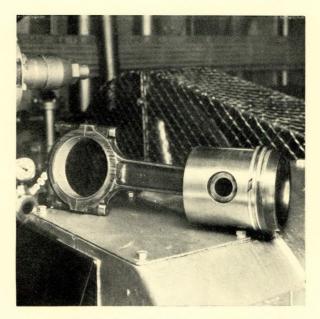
Vee-block refrigerating compressor: piston and connecting rod assembly as removed from machine
